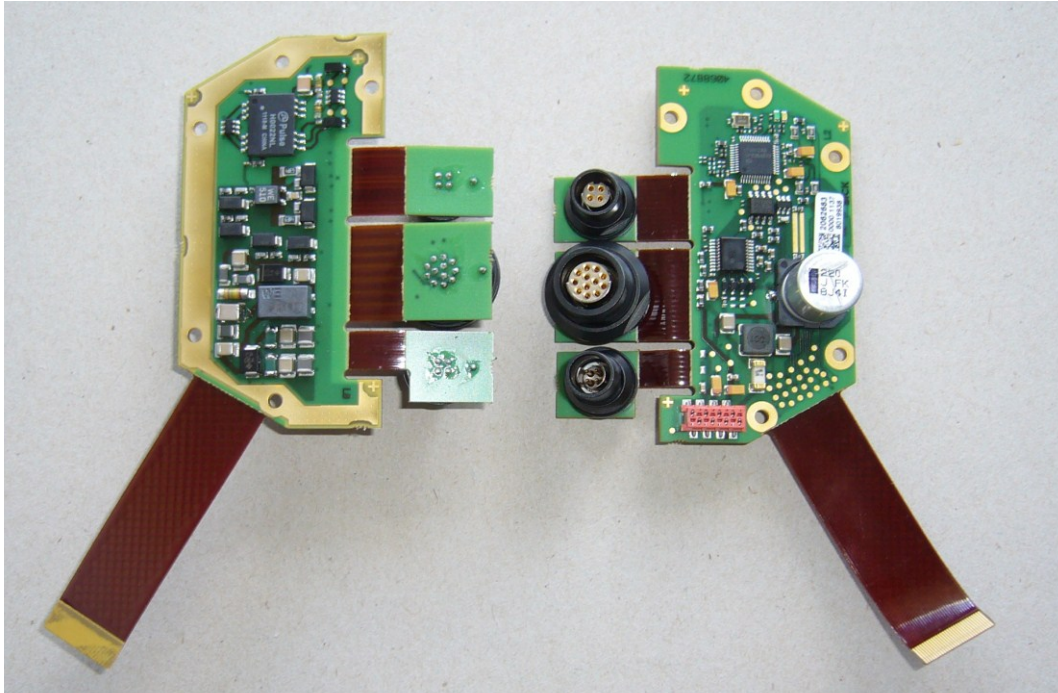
Bottom side (left) and top side (right) of the PCB Interface.
